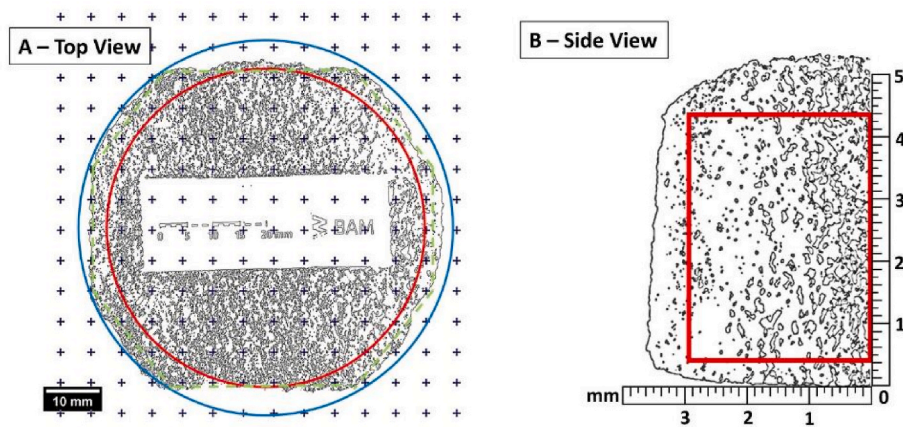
A) top view of printed disc B) half of side view with camping designed and actual shapes.
